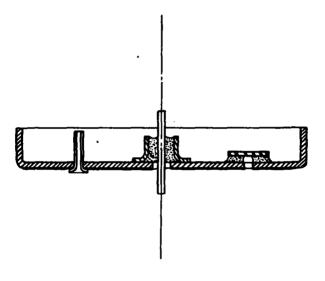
Schematic drawing of the completer 1.8 inch diameter cell top with fill port, vent and G/M feedthrough.
